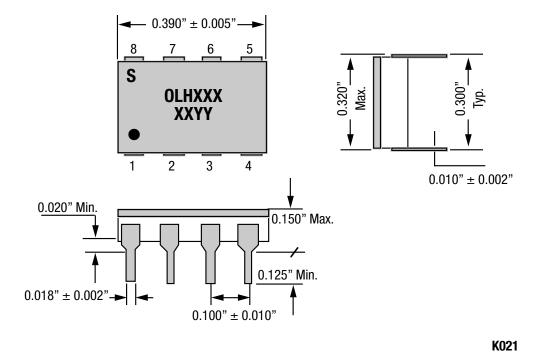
OLH2047/OLH2048/OLH2049 Package Dimensions
